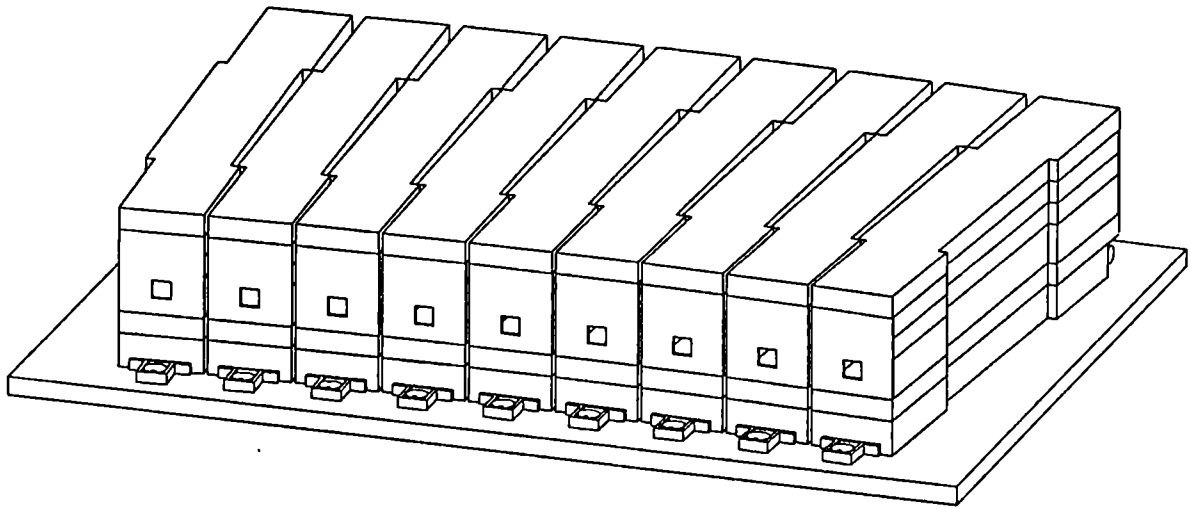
Perspective view of the front face of the nine fold collimator system, mounted on an aluminium baseplate.
